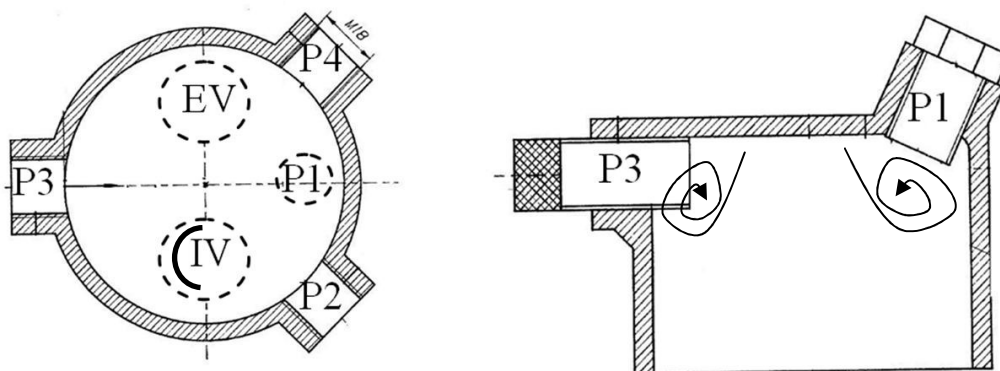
Top and side view of the CFR-engine, P1-P4: sensor positions, IV: shrouded intake valve, EV: exhaust valve
